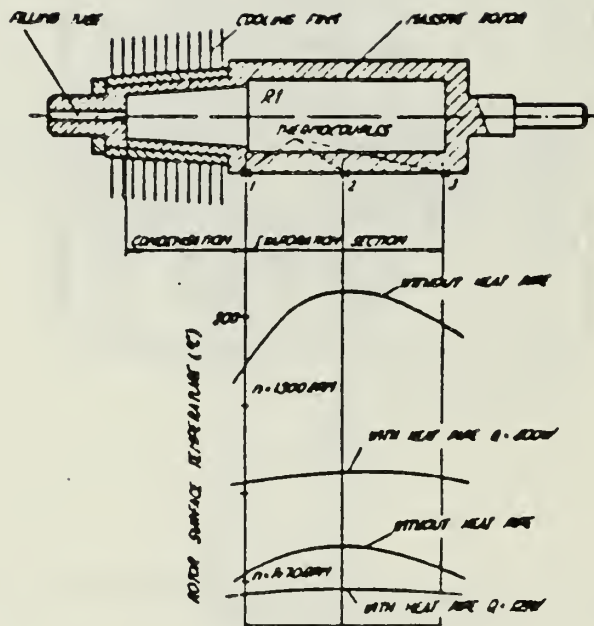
Heat-Pipe-Cooled Induction Motor [39].
